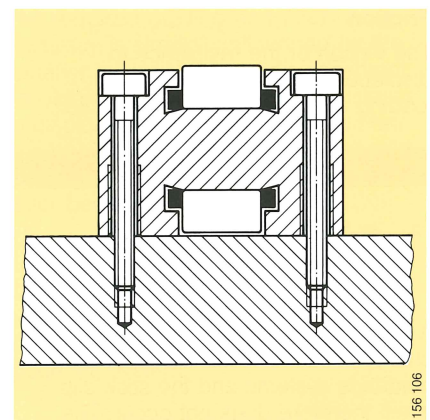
Fixing screws fitted through the linear roller bearing and fixed into threaded holes in the machine component
